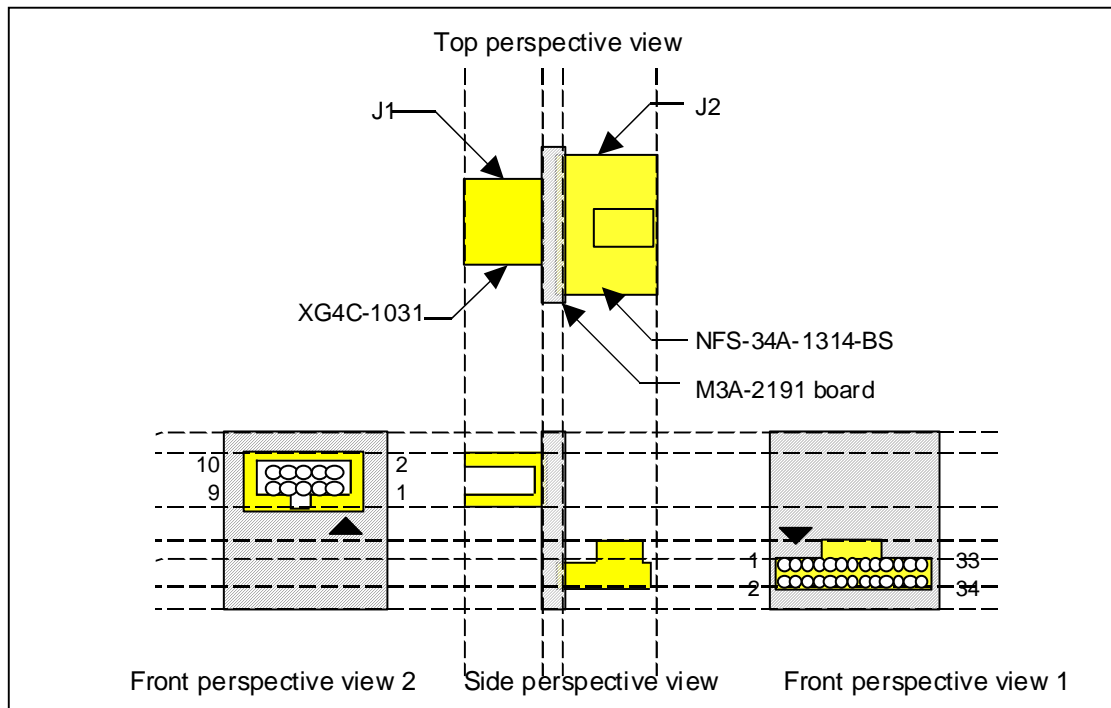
Dimensional Outline Drawing and Pin Layout of the M3A-2191
